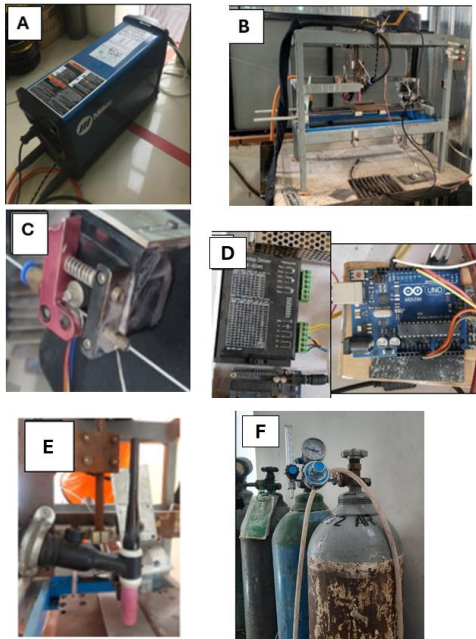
Equipment used in WAAM-based TIG welding (A) Miller Dynasty 210 DX welding machine, (B) Machine construction, (C) Wire feeder, (D) Motor driver and Arduino, (E) Torch welding, (F) Argon gas cylinder.
